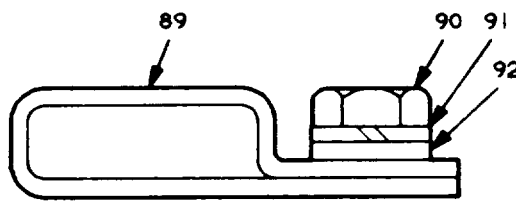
SHELTER ASSEMBLY (SHEET 6 OF 24)
